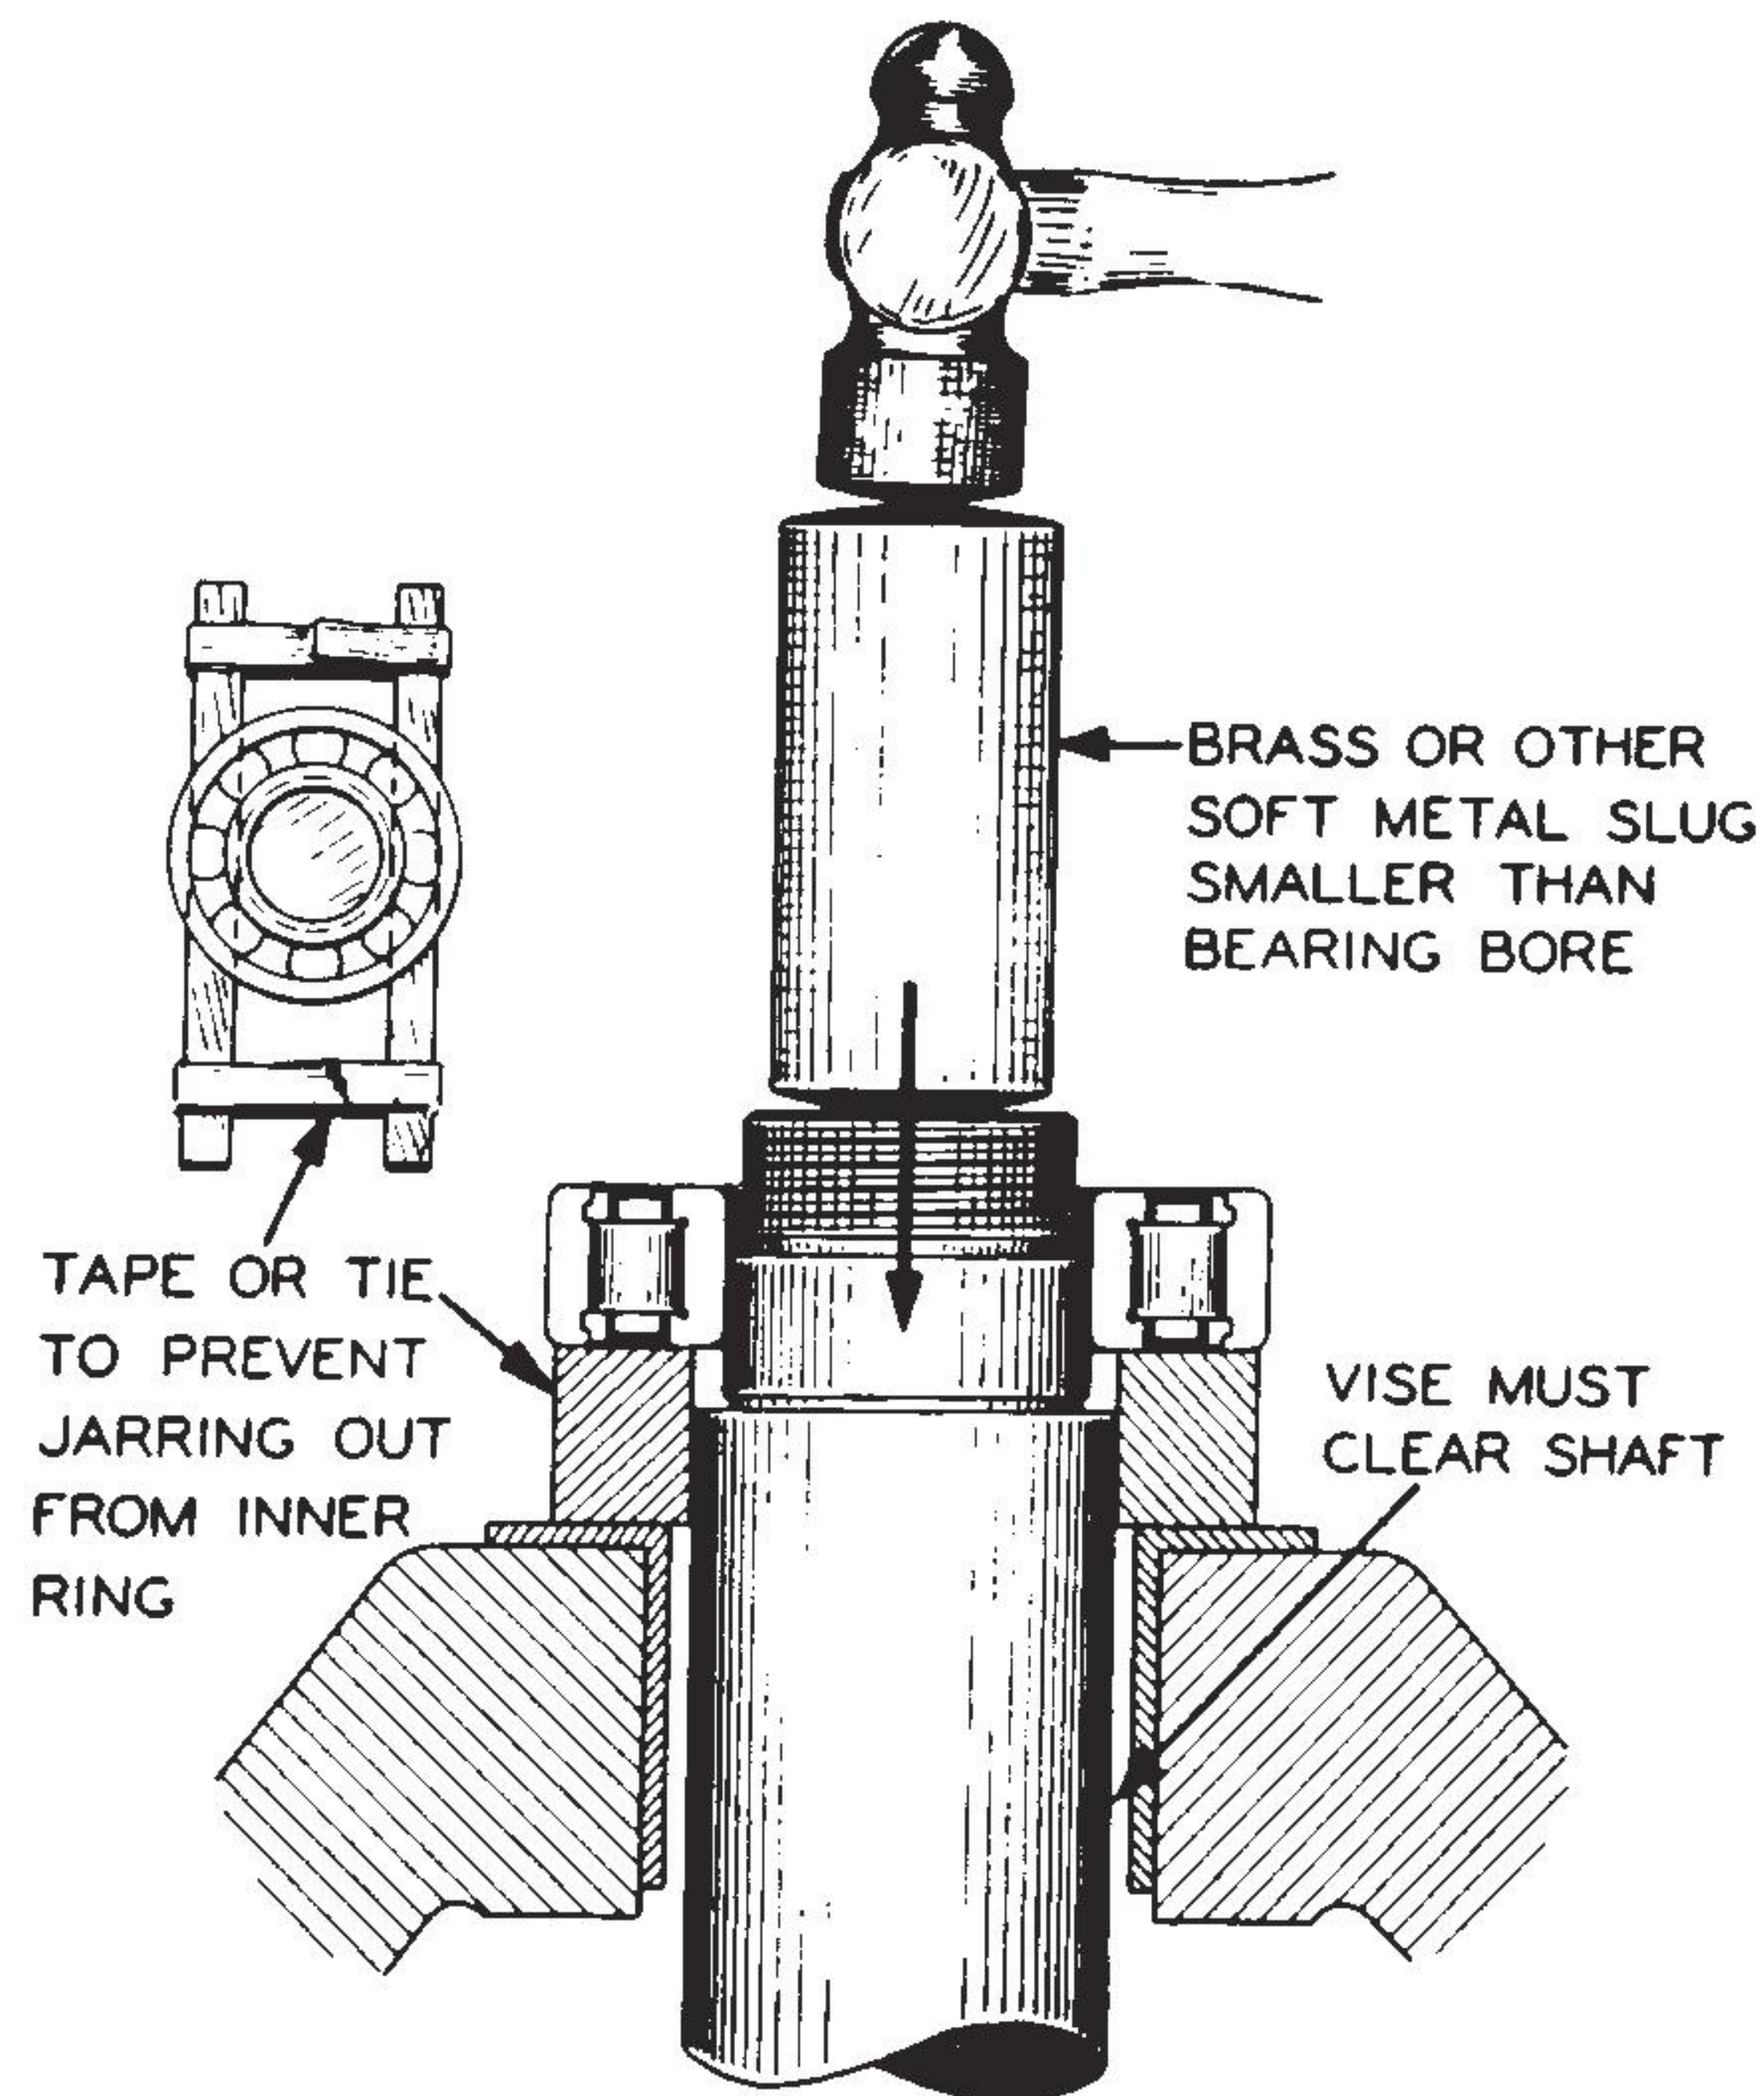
Method to remove small bearings by driving shaft through supported bearing.
